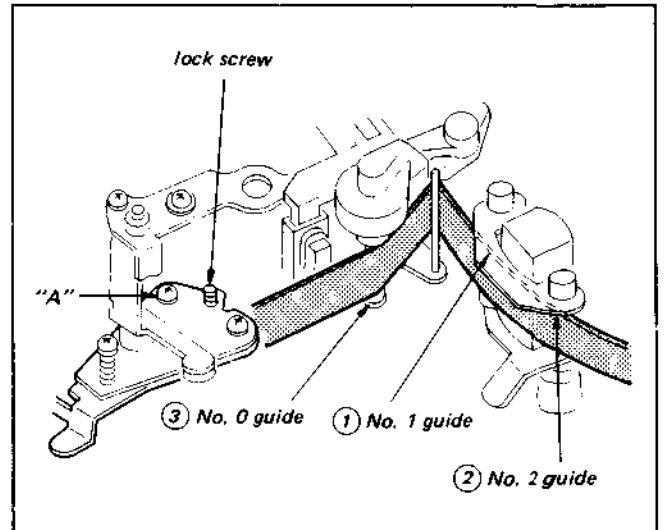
Replacement and adjustment (2) of tension regulator arm plate assembly
